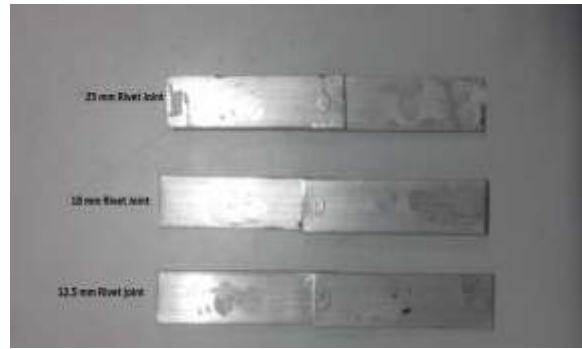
Actual Specimen of Rivet joint having lap length 12.5 mm, 18 mm & 25 mm
